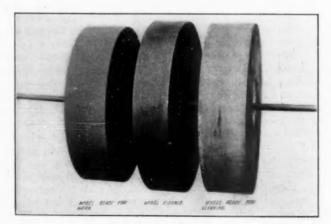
CLEANED WHEEL READY TO "LAY UP."
